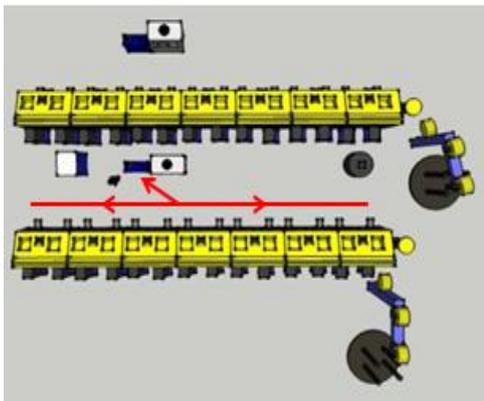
An extra welder and pointer was refurbished and placed at the machine eliminating the operator to throw the wire over the machine.
